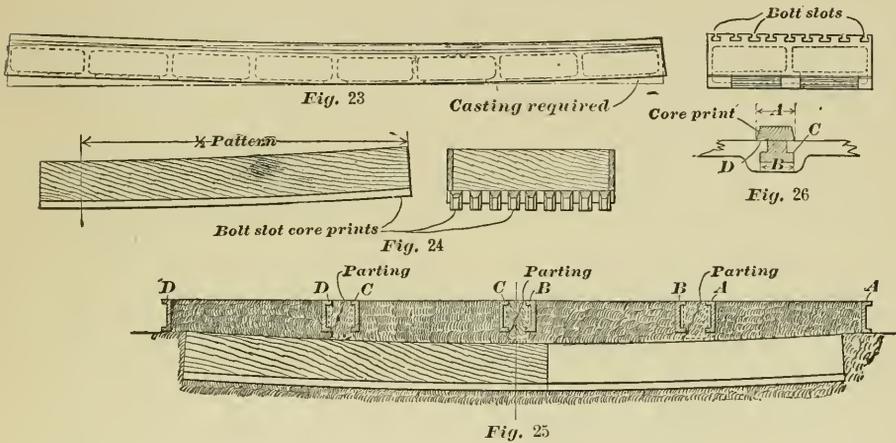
Warped Casting. Fig. 24. Pattern for Bed Plate
